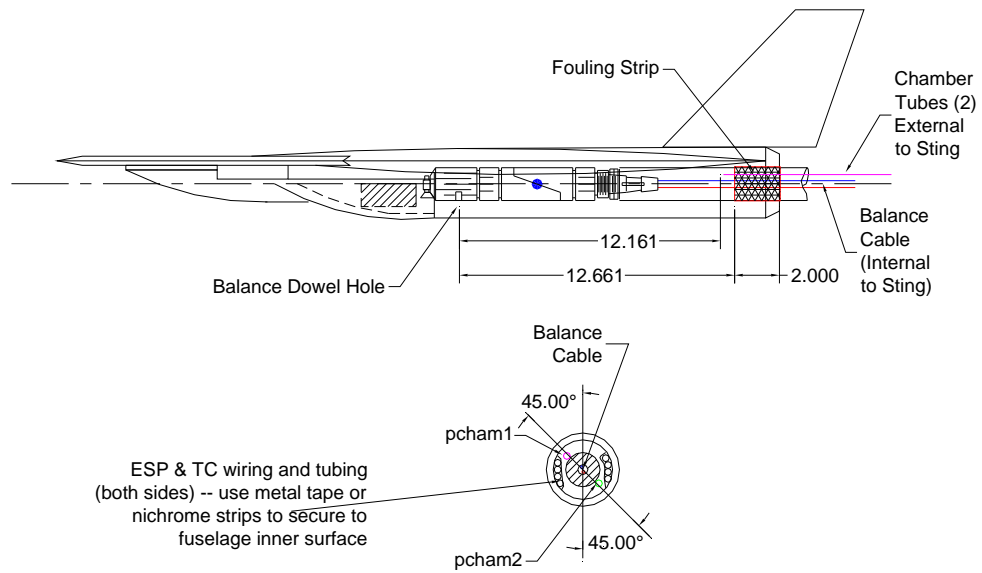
Chamber pressure tube and fouling strip layout on the 65° cropped delta wing model. (Dimensions are in inches.)
